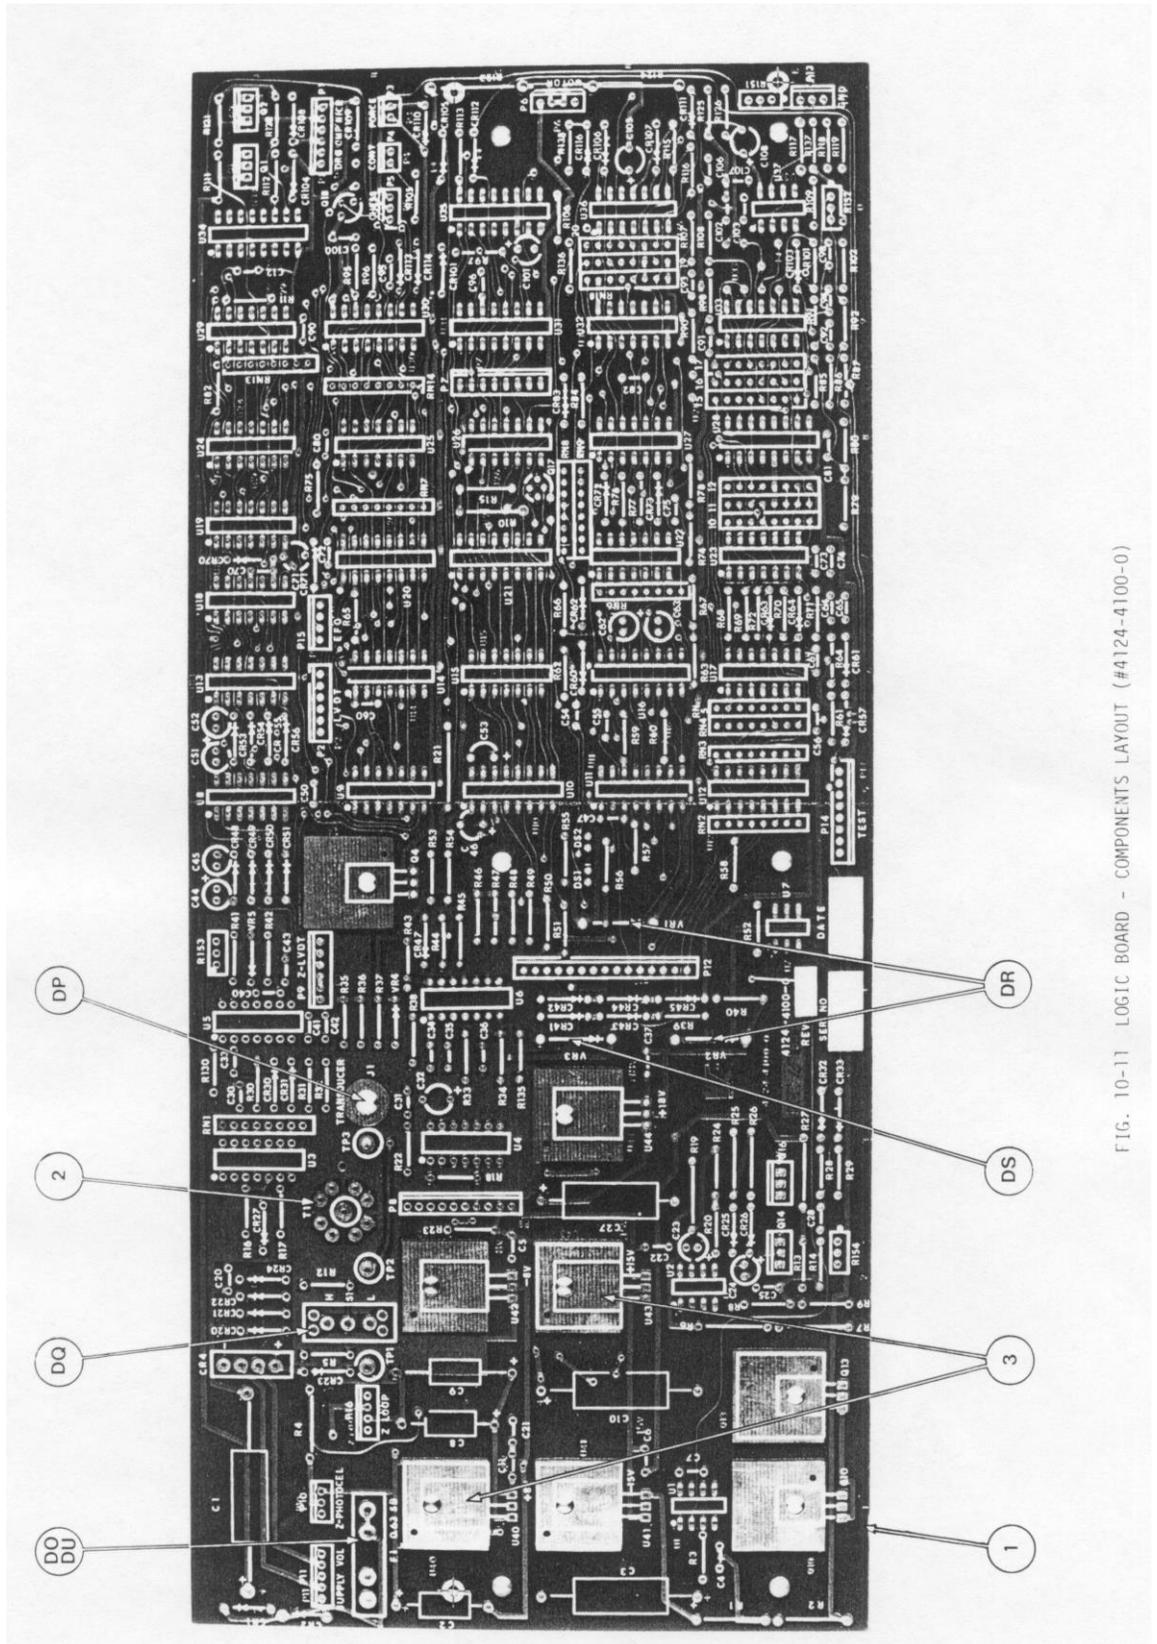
LOGIC BOARD - COMPONENTS LAYOUT (#4124-4100-0)
